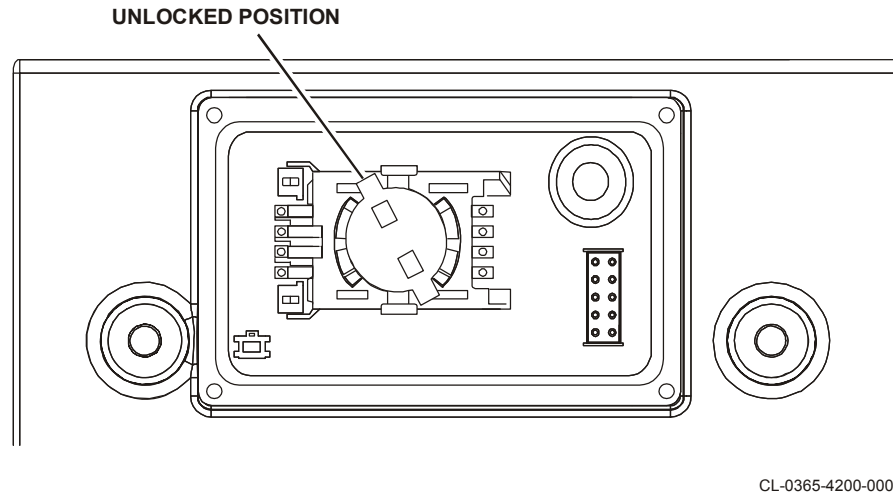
Opening the USIM Card Holder on RF-7800B-DU024
